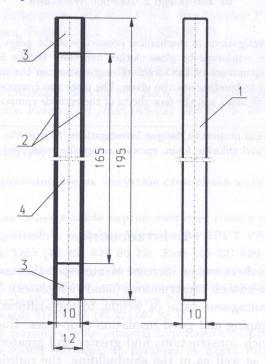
The shape and dimensions of the test piece used in testing; 1 – test piece, 2 – face sheet, 3 – pads of aluminium alloy, 4 – core.
